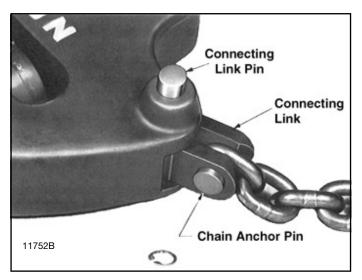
Removing Connecting Link Pin from 3 Ton Lower Block Assembly
